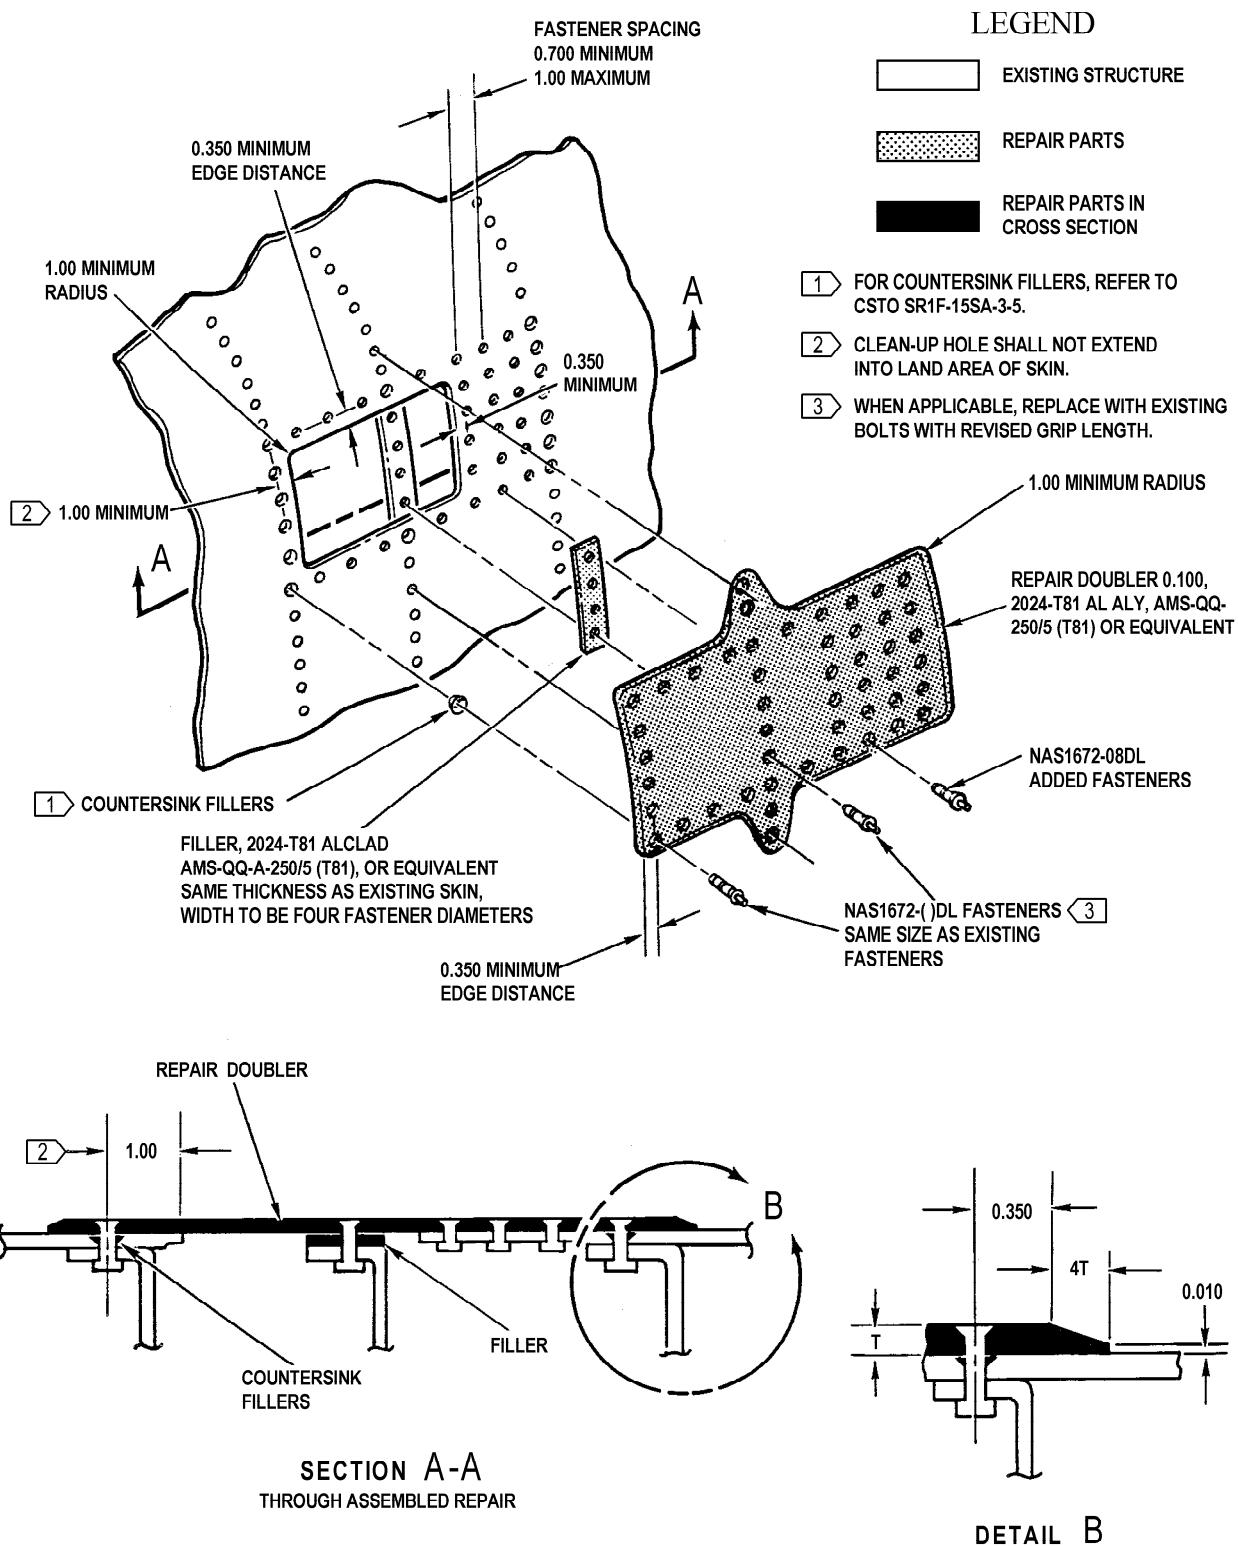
Skin Repair for Damage not Exceeding 25 Square Inches, Over Structure
